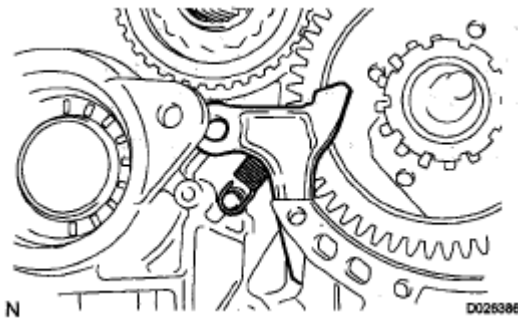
Identifying Spring, Pawl Pin And Parking Lock Pawl
